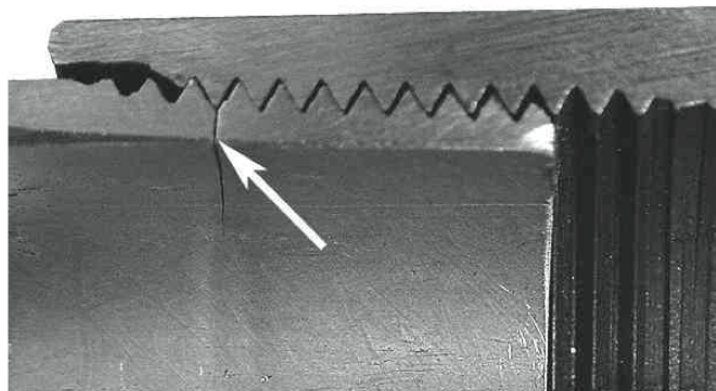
Crack initiation at the root of the last engaged thread of a threaded riser connection taken from [54]
